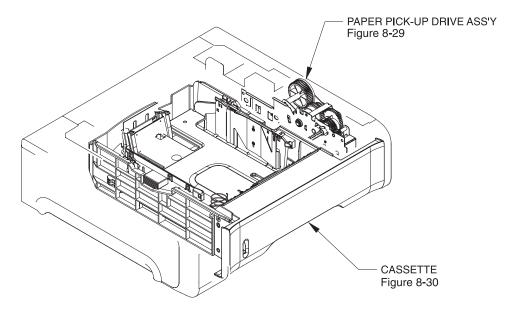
Main parts (3 of 3) 500-sheet paper feeder
